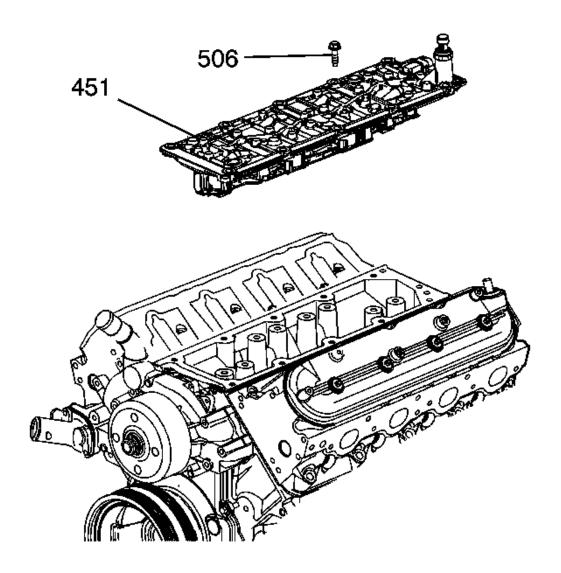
View Of Valve Lifter Oil Manifold Courtesy of GENERAL MOTORS CORP.
